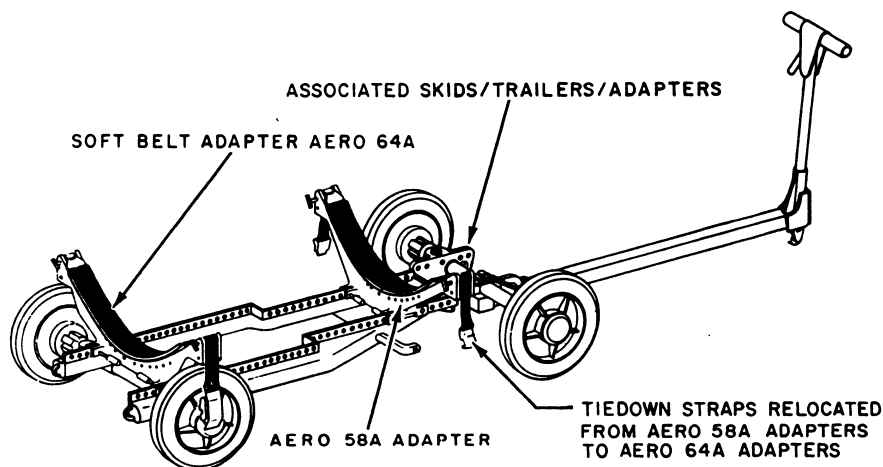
Aero 64A soft-belt adapter mounted to Aero 58A skid adapters/Aero 21C weapon skid.
